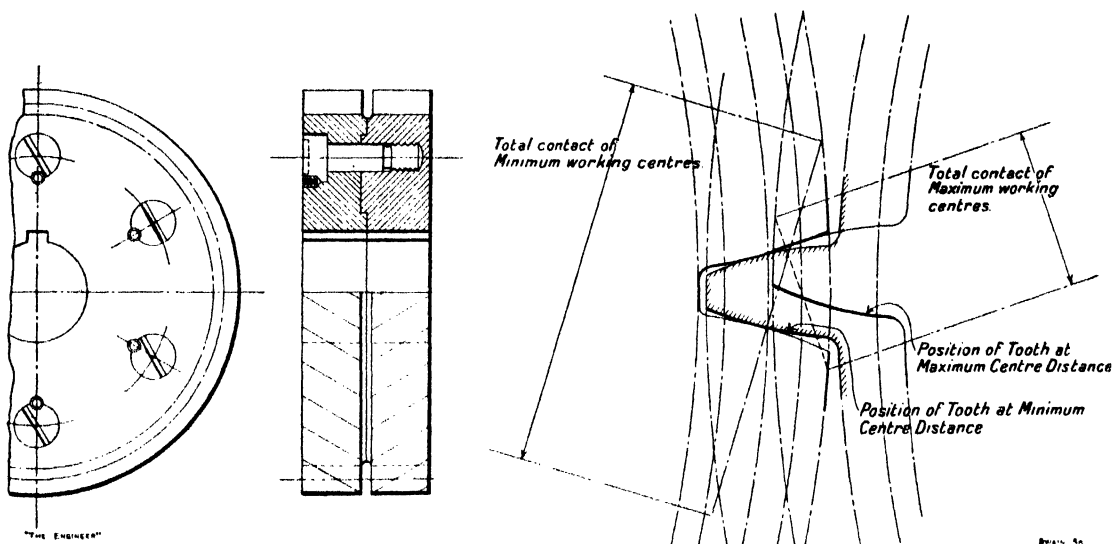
DOUBLE HELICAL GEAR FOR WIRE-FLATTENING MACHINES.
